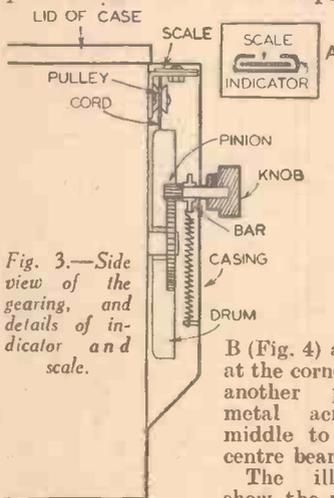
Side view of the gearing, and details of indicator and scale.
